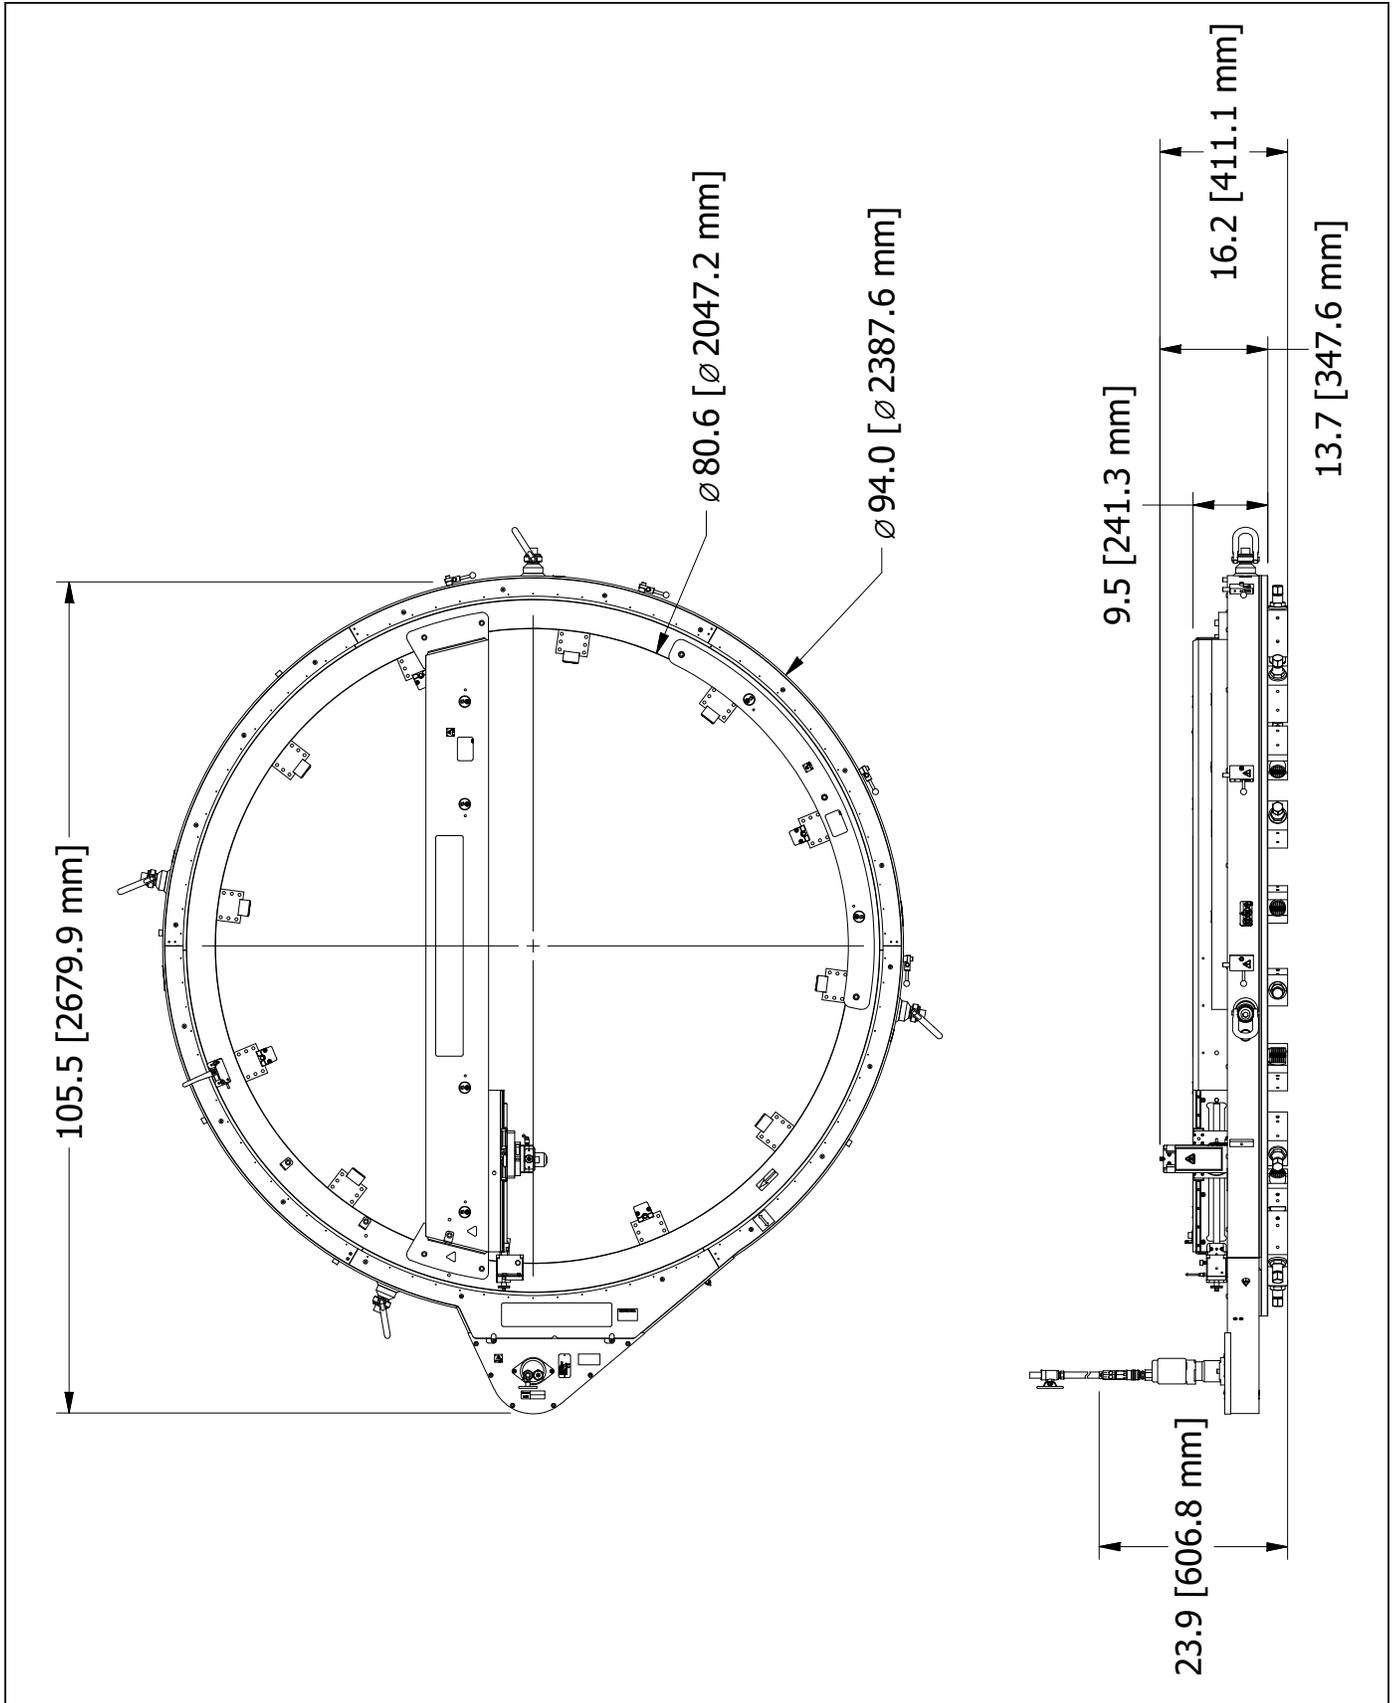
ODF80 SPEED FACER DIMENSIONS (REF. 94770)
